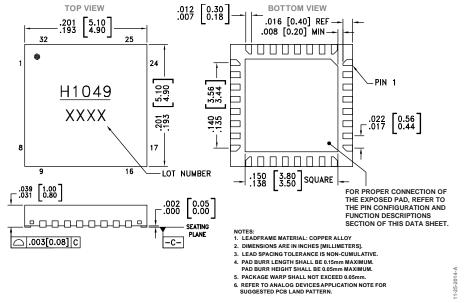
32-Lead Quad Flat No-Lead Package [QFN] 5 mm × 5 mm Body, Very Thin Quad Dimensions shown in inches and [millimeters]
